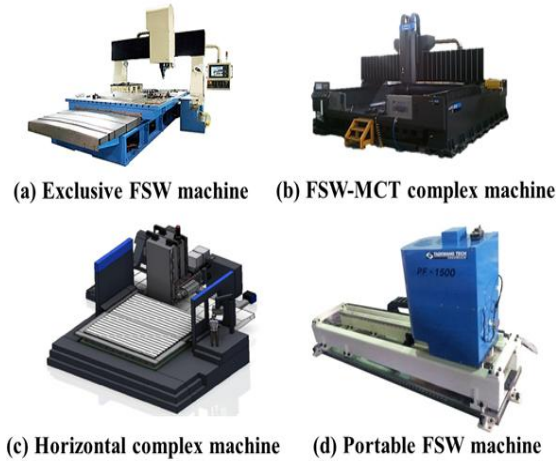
New FSW machines developed by Taekwang Tech Co., LTD
